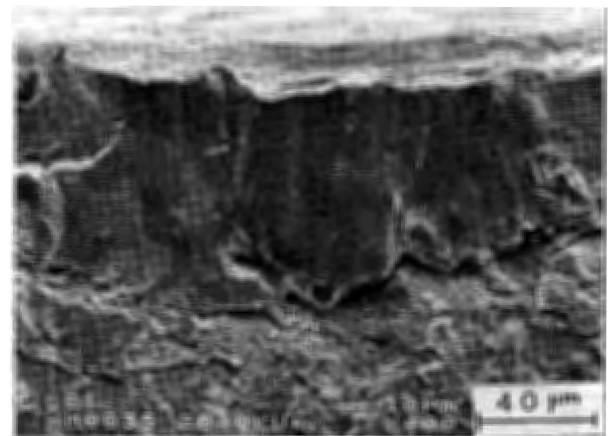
Fractograph showing enlarged view of crack initiation shown in Fig. 18
